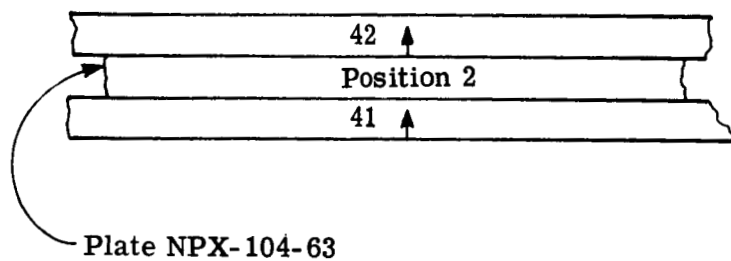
(a). Plate Assembly Showing NPX-104-63 in Position 2
